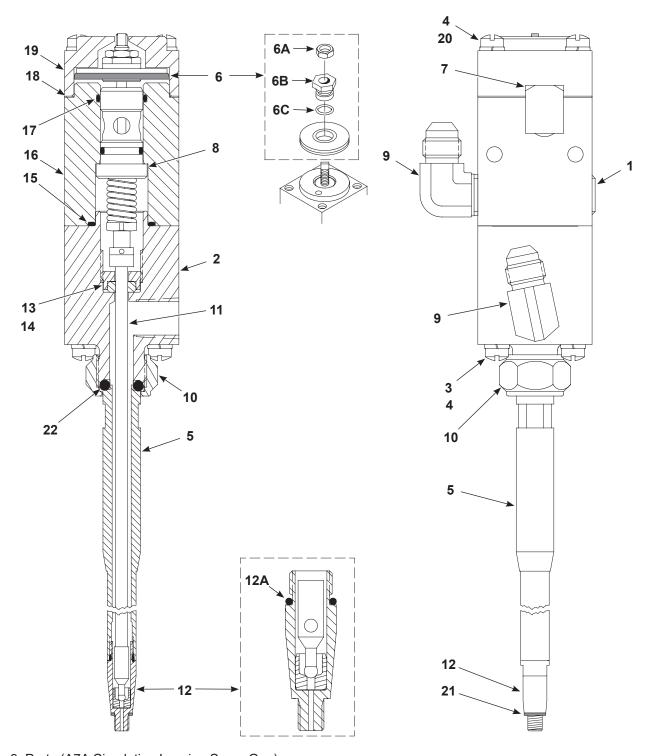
Parts (A7A Circulating Lancing Spray Gun)
